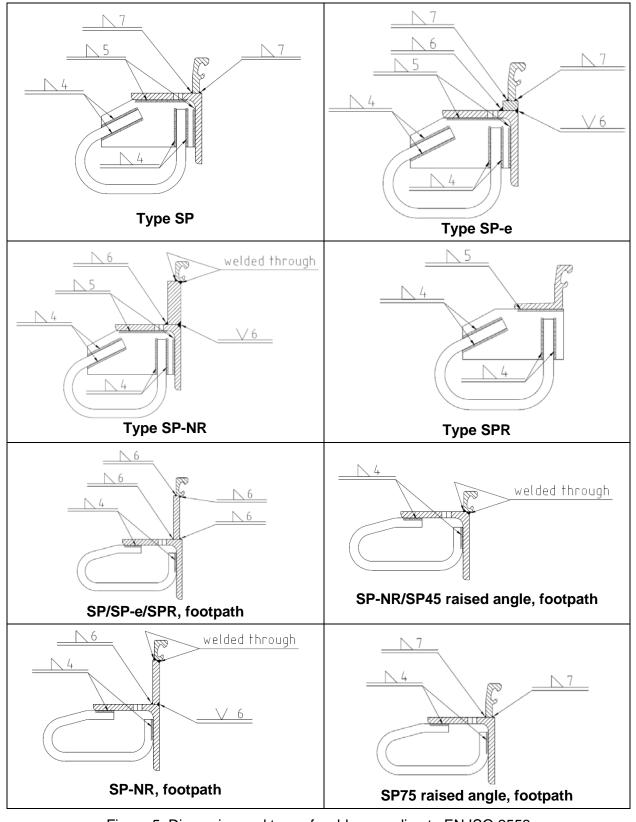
Dimension and type of welds according to EN ISO 2553
